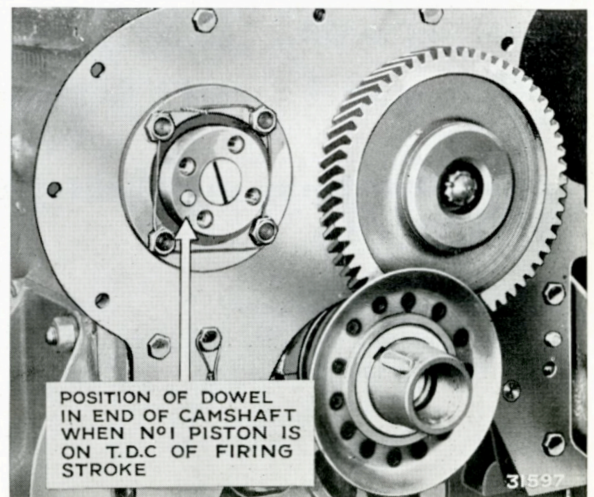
GEAR LOCATING DOWEL IN CAMSHAFT END
